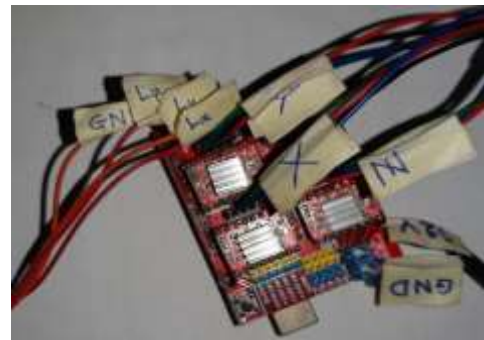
Connecting the stepper motor and position sensor to the CNC Shield
